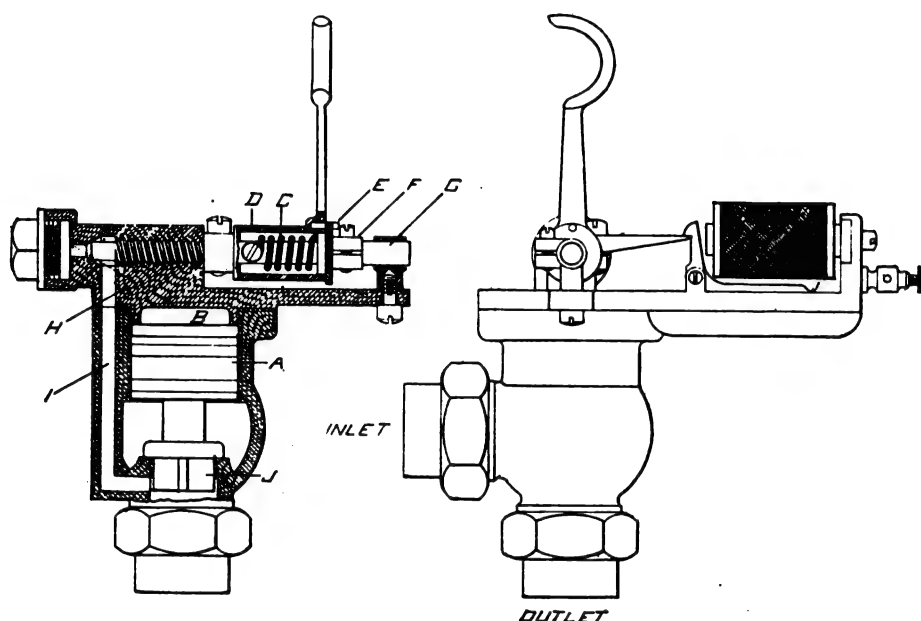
LOCKE AUXILIARY ELECTRIC VALVE.
